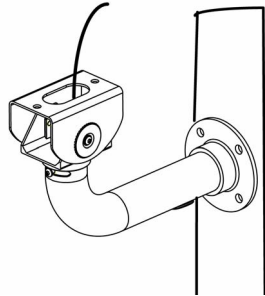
Feeding the Wire using the Bottom NPT Fittings
